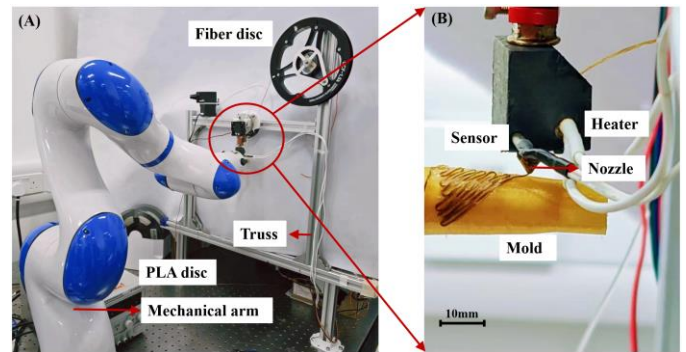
MULTI-AXIS PRINTING PLATFORM AND PRINTING HEAD
